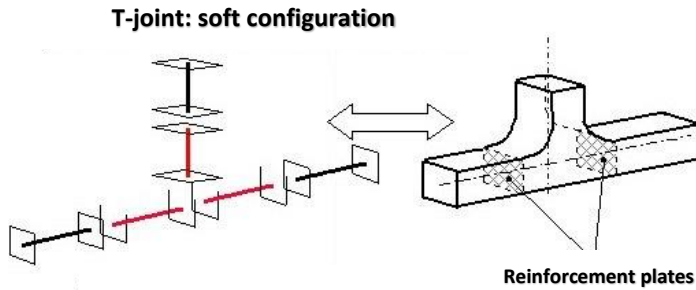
Example of modeling guideline for a joint modeling in the “beam and shell model” with two reinforcement plates
